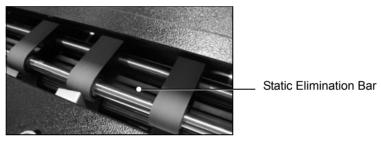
The Static Elimination Bar in the Connecting Bridge
